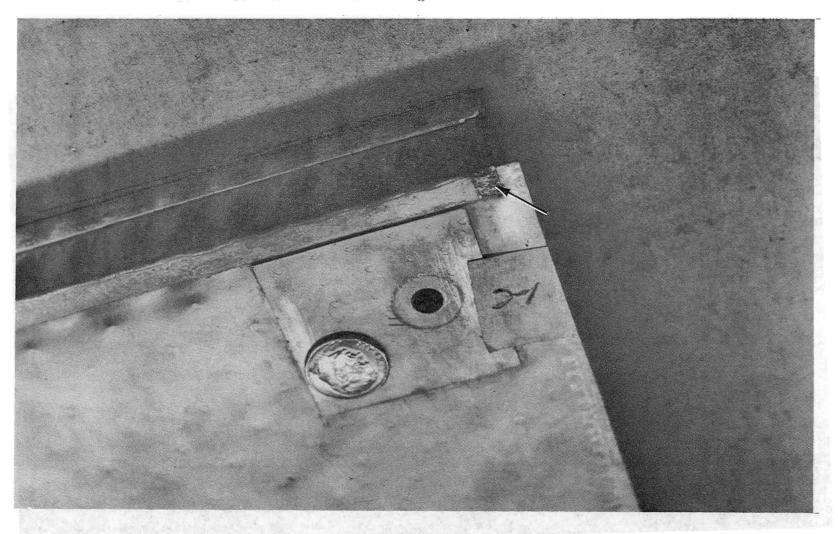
A Small Opening at the Intersection of Edge Closures and Skin was Closed with a 0.08mm (0.003 inch) by 5mm (0.2 inch) by 8mm (0.3 inch) Patch Resistance Welded Over the Opening
